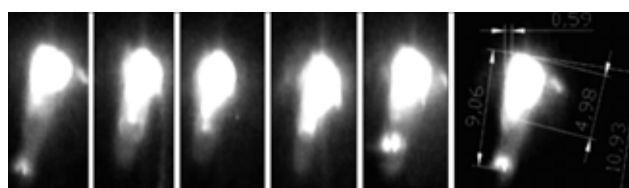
Mechanism of molten metal transfer from the cavity into the weld pool under the laser beam
